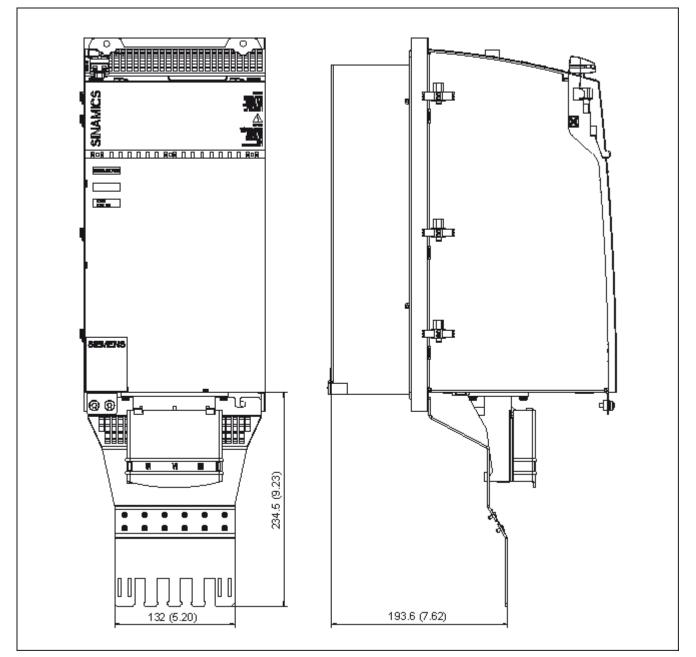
Dimension drawing of shield connecting plate on a 200 mm component with external air cooling, all dimensions in mm and (inches)
